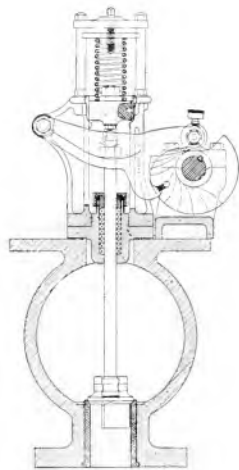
Assembly of one of the Controlling Valves for First-stage Steam Nozzles
